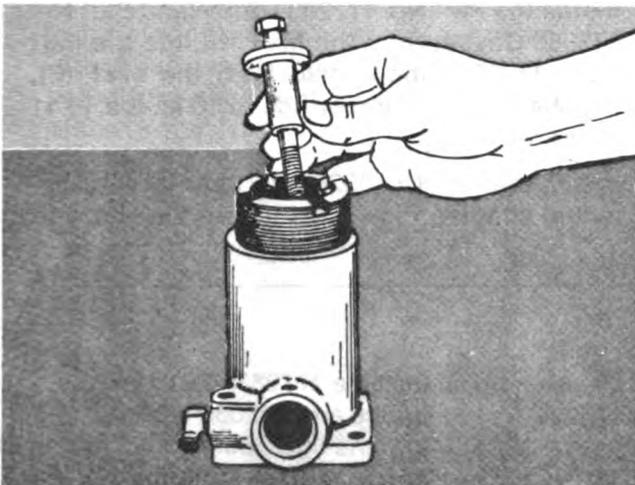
Install The Spacer And Retainer Capscrew.
